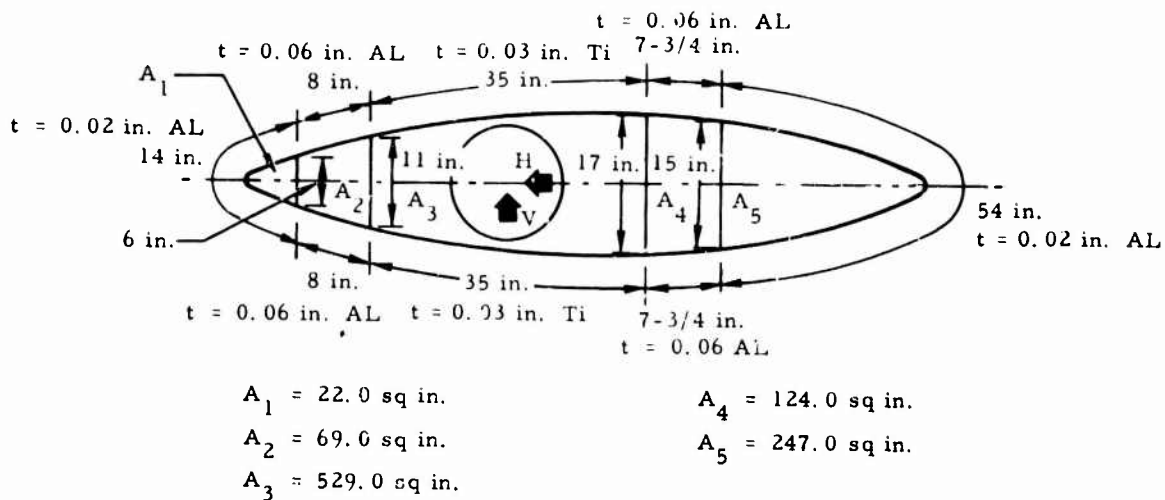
Structural Arrangement at Rib-Wing Station 159.5.
